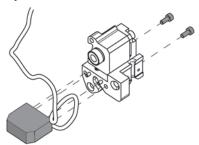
Screws Securing NIFS Sensor to Linkage Body
